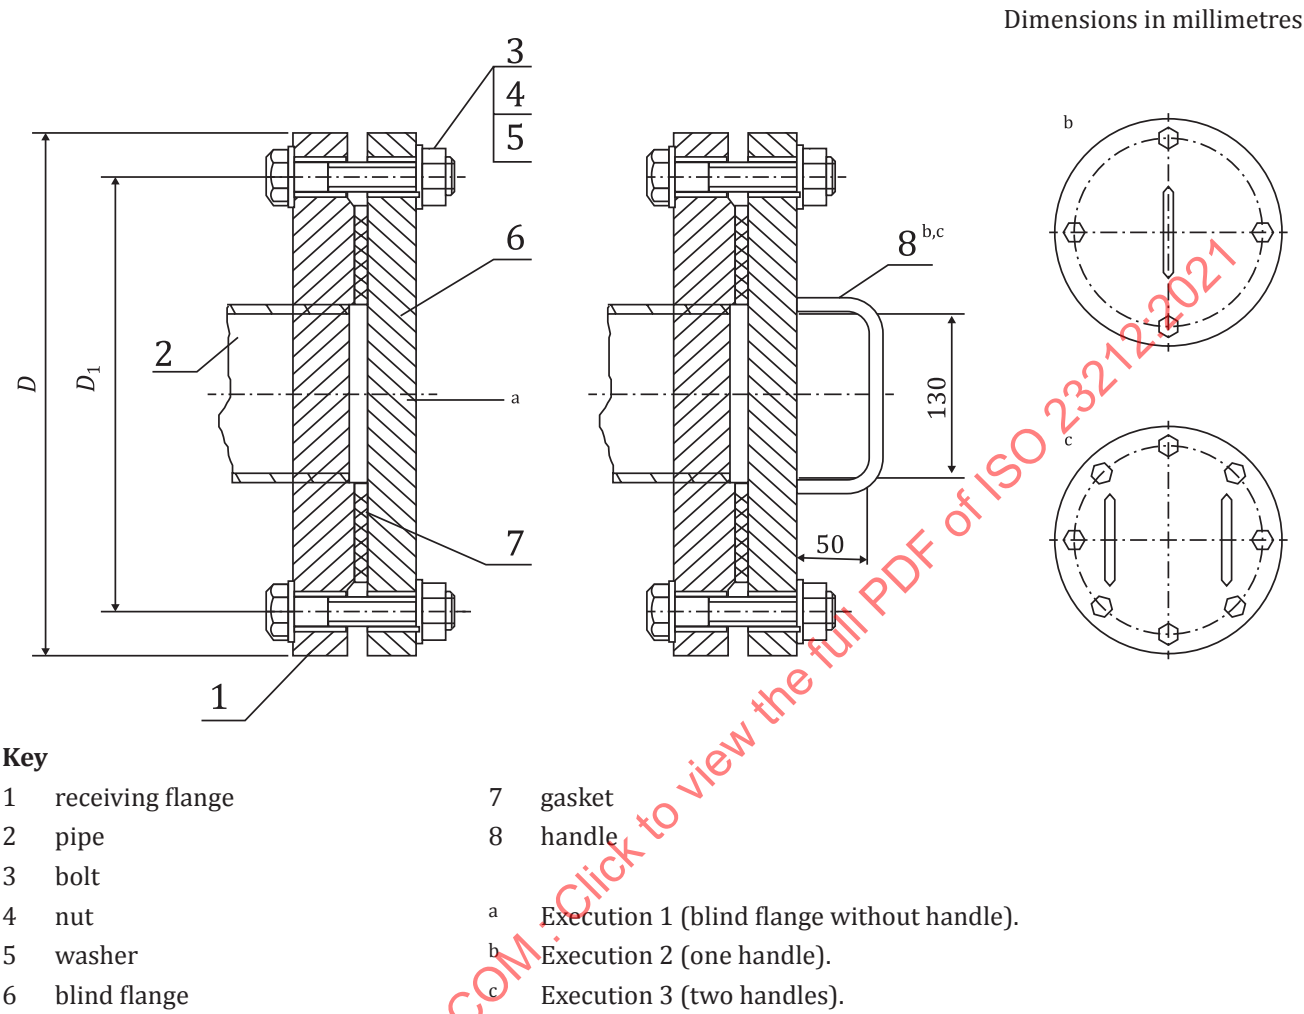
Flange connections for bunker fuel and lube oil transfer
